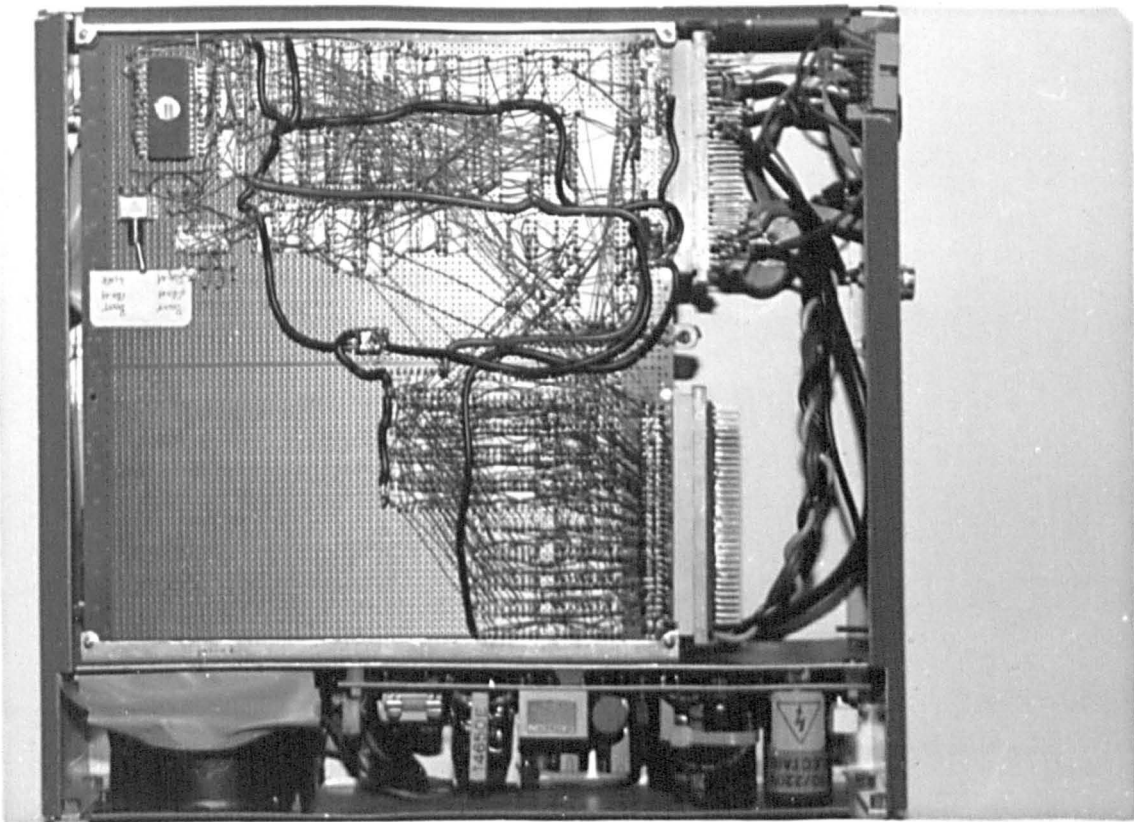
The portable, electronic weld gauge circuit boards viewed from below
